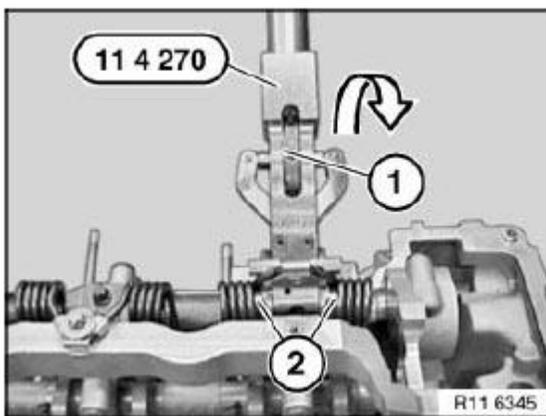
Identifying Bearing Pins And Knurled Screw With Special Tool (11 4 270)
